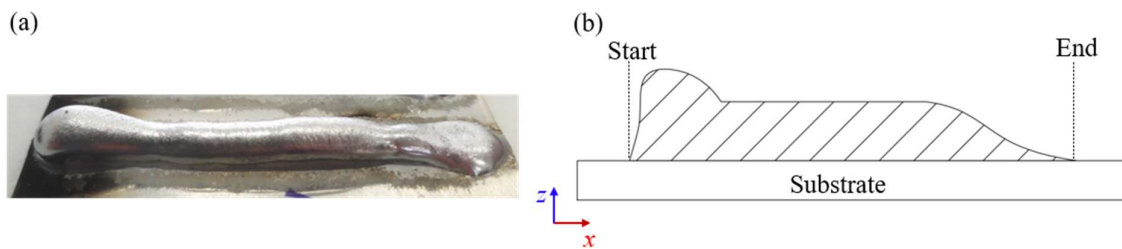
An uneven weld bead: (a) real weld bead (a) and (b) schematic cross section of a weld bead
